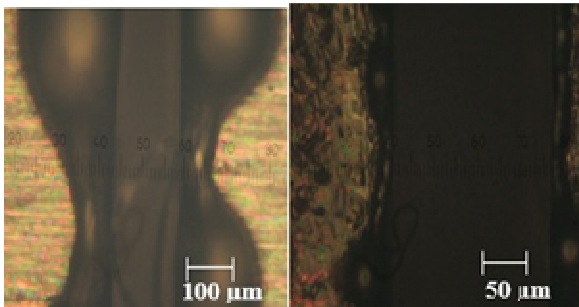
Sections on cutting parts of samples with 0,35 mm (left photo) and 0,50 mm (right photo)
